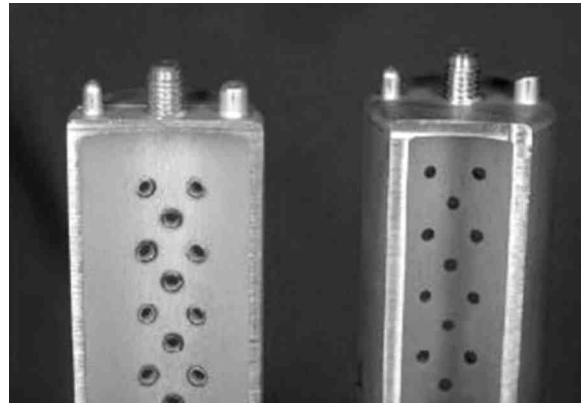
Passenger side airbag housing with sections showing deburred holes.
